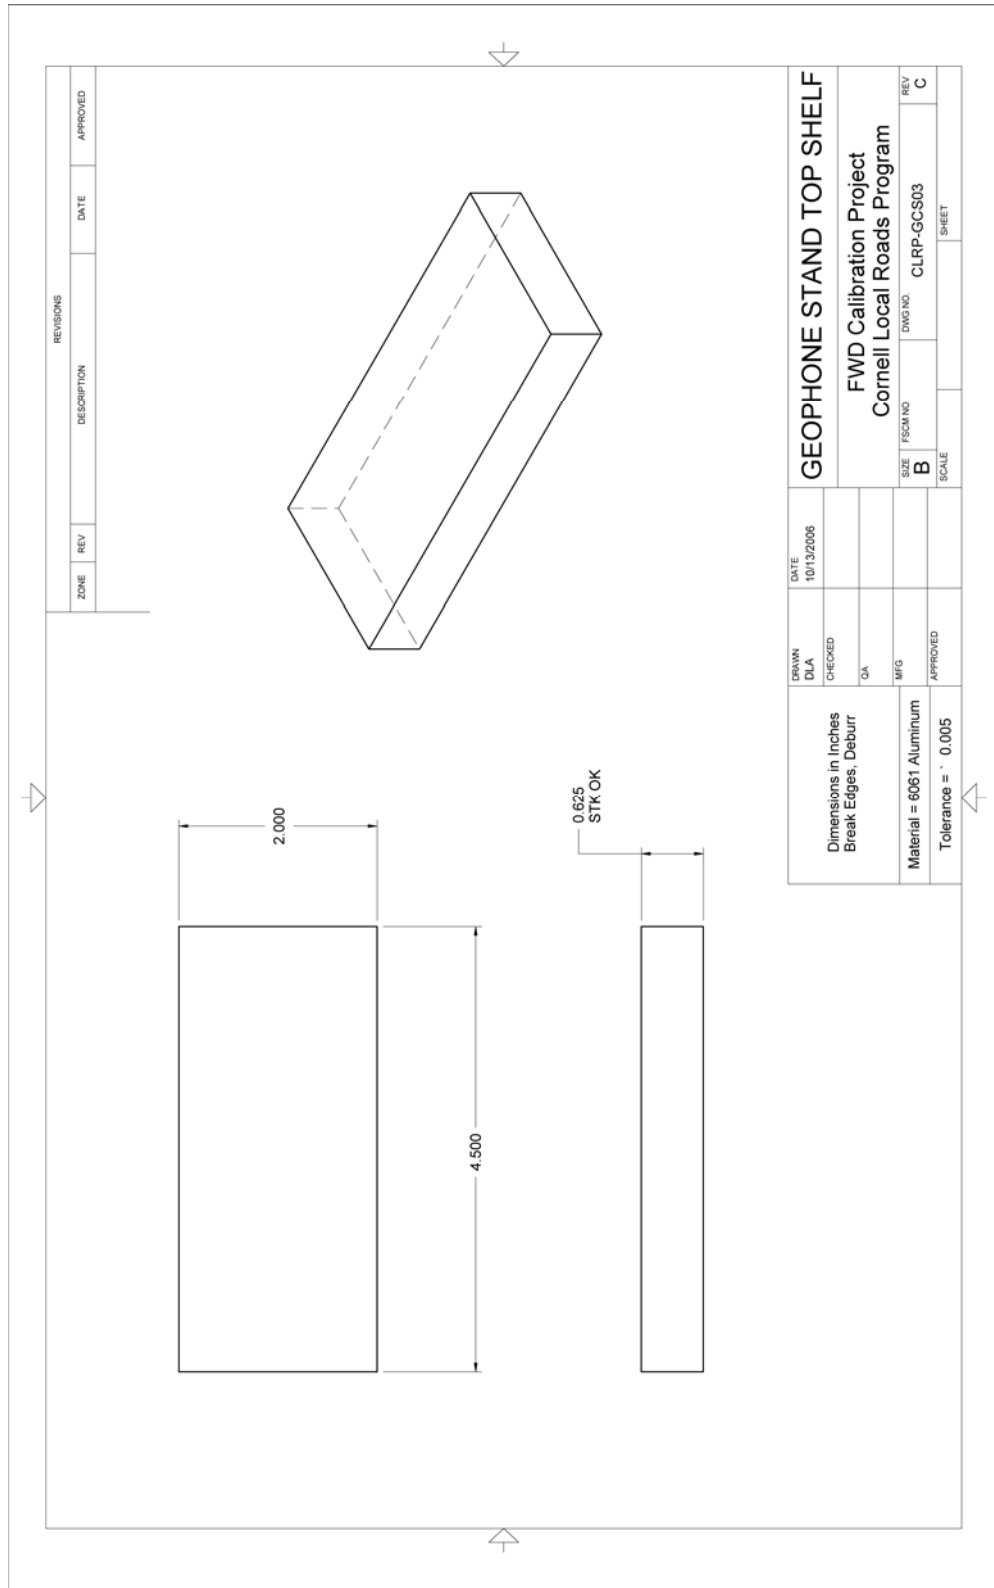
Drawing. CLRP-GCS03 Geophone Top Shelf.
